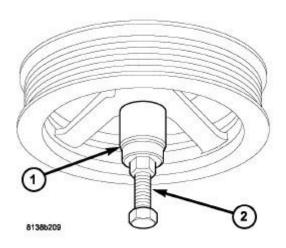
Removing Crankshaft Damper Courtesy of CHRYSLER LLC
